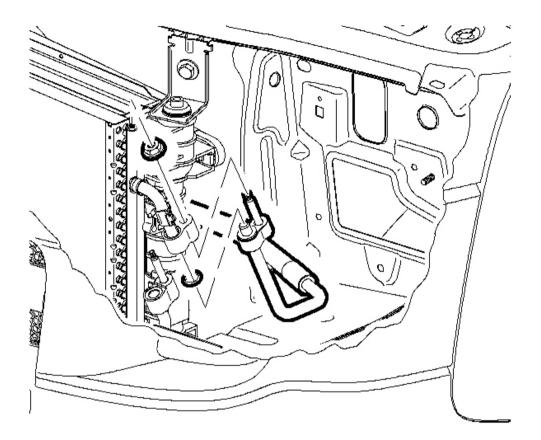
Compressor Hose, Nut & Battery Box Courtesy of GENERAL MOTORS CORP.
